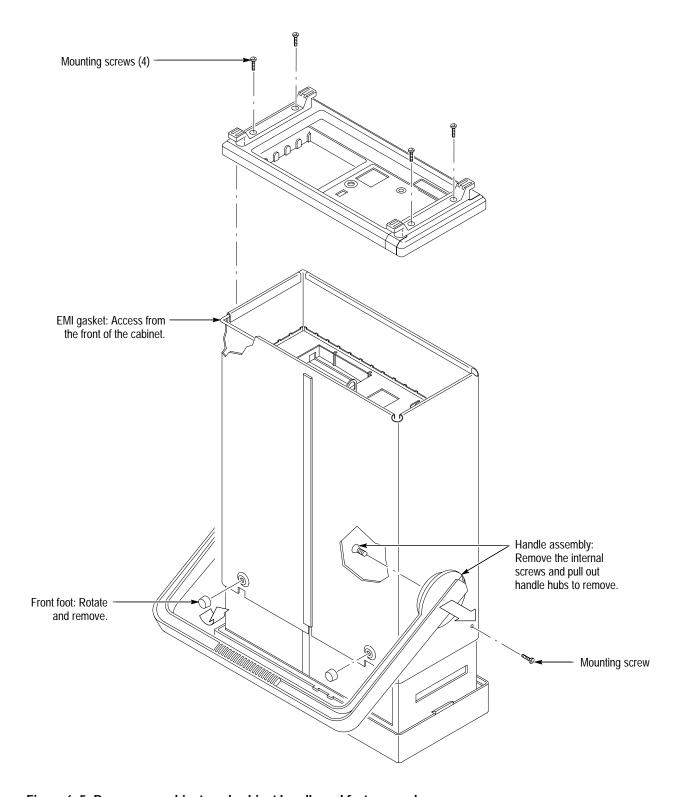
Rear cover, cabinet, and cabinet handle and feet removal
